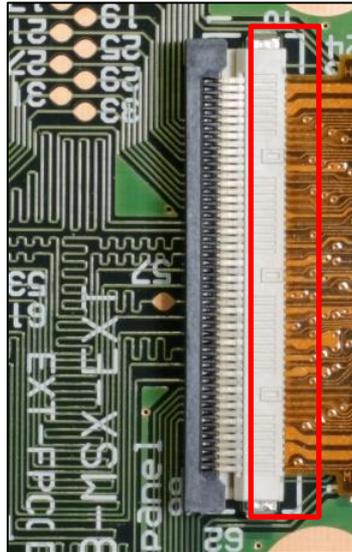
Aligned FPCs for Both Board and Panel Sides
